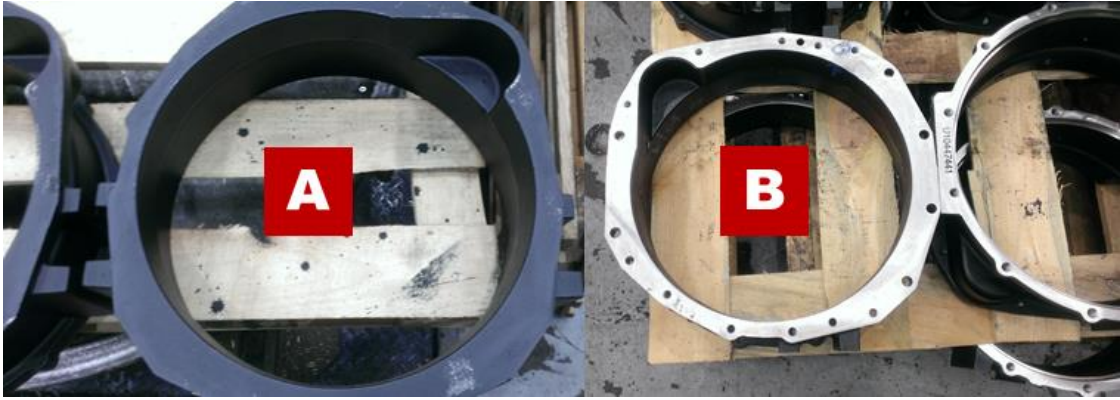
Cell150 Work-piece - "A" flywheel raw cast iron, "B" processed flywheel
